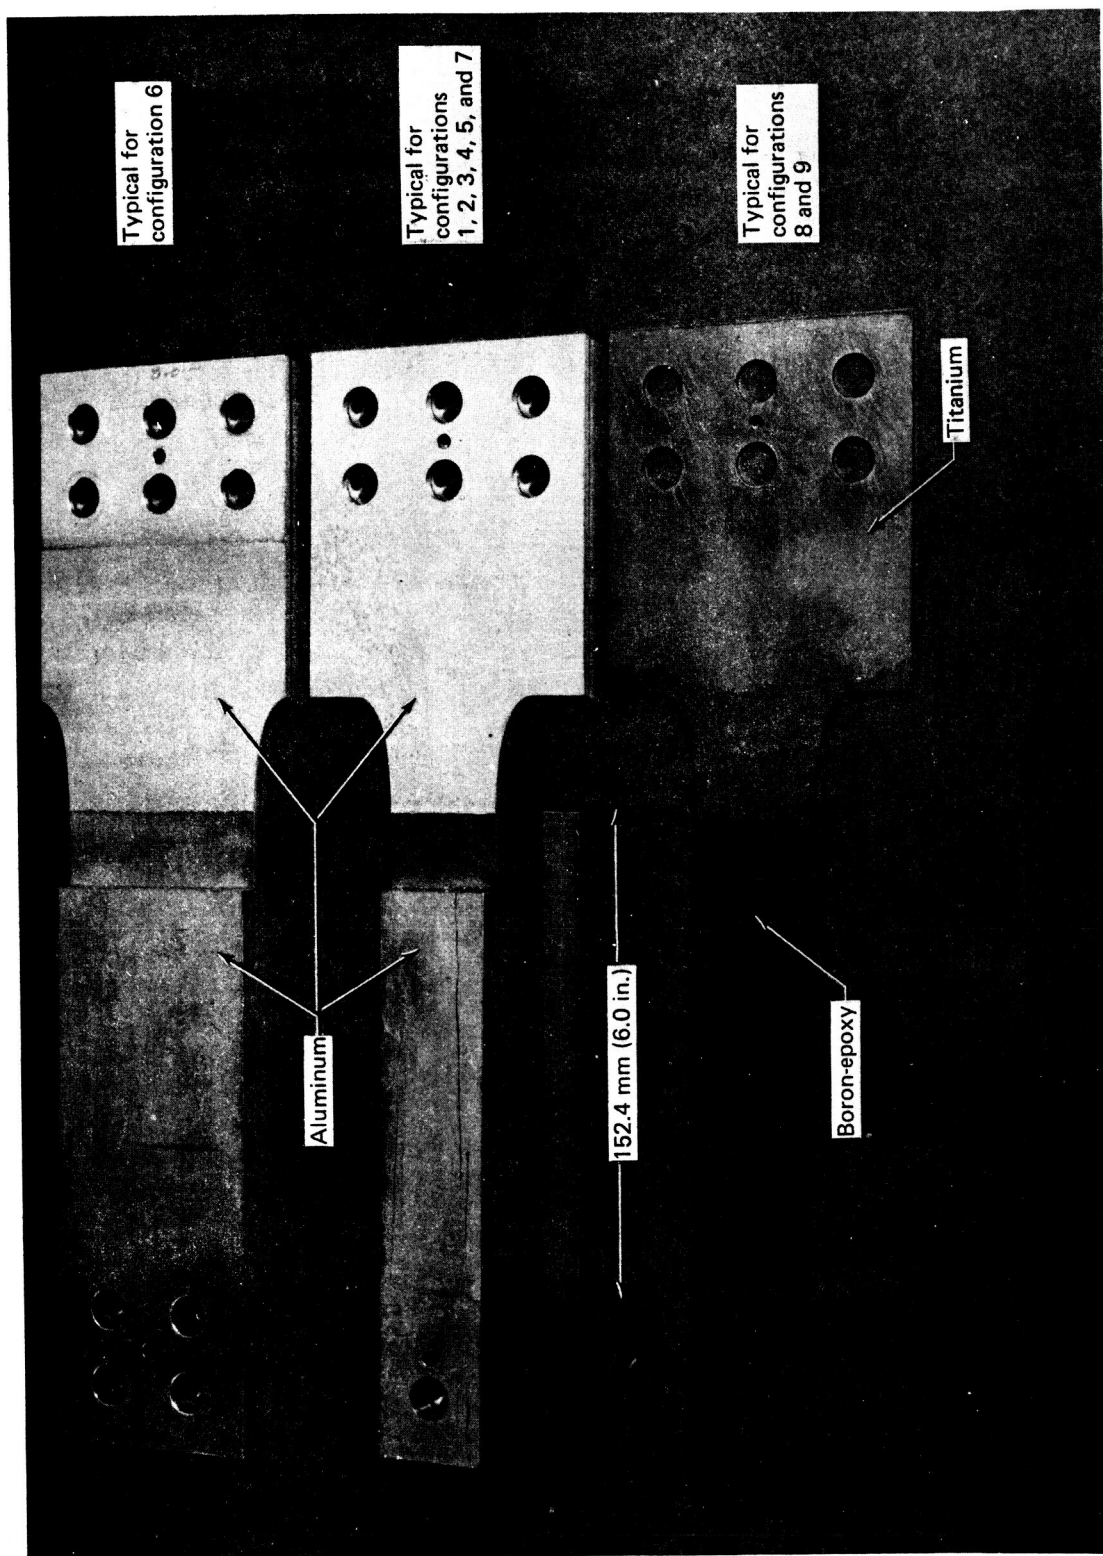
CYCLIC DEBONDING TEST SPECIMENS
